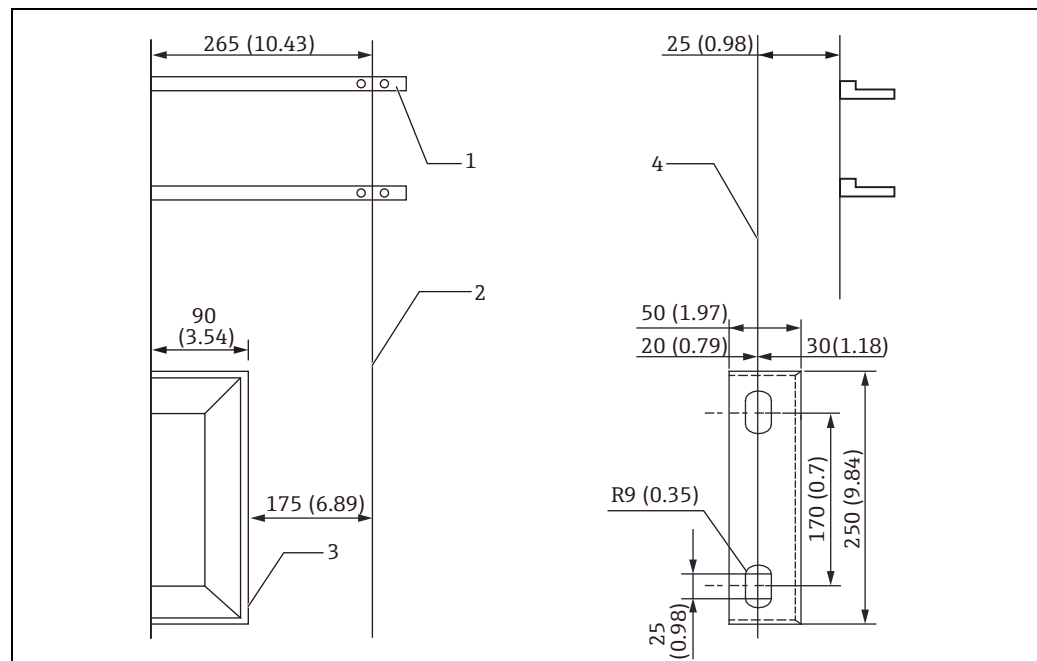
Gauge supporter (high pressure) Unit: mm (in)
